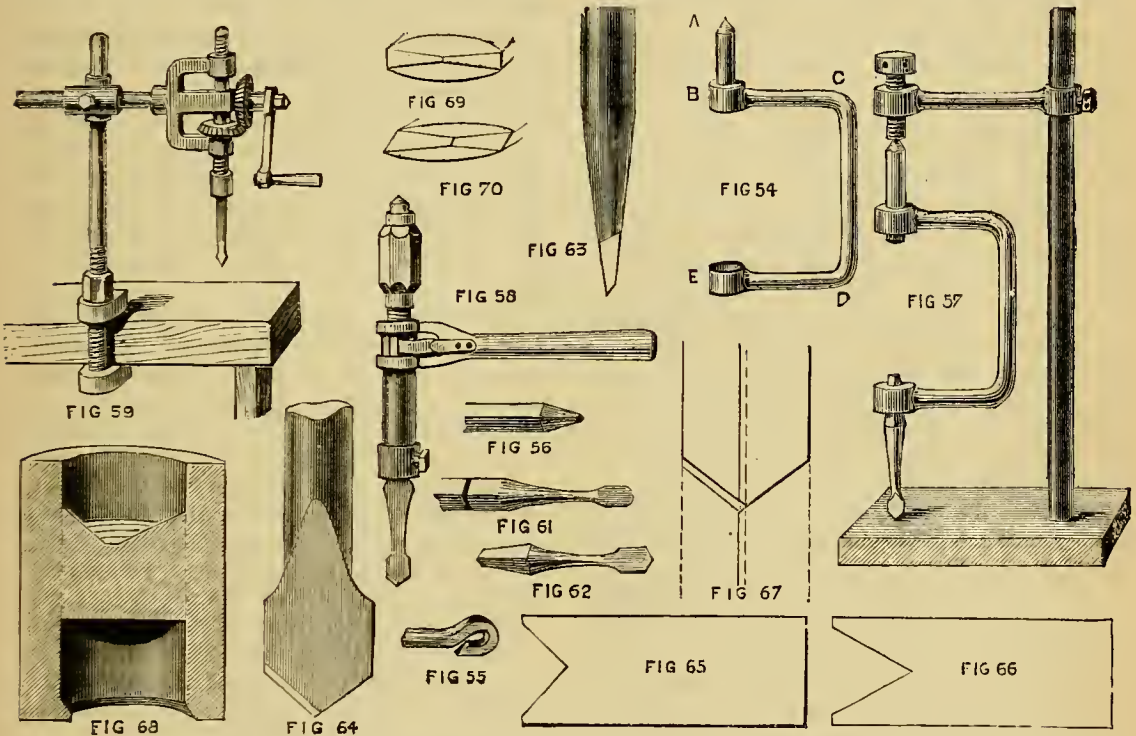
DRILLING BRACE. FIG. 55.—MODE OF TURNING EYE FOR BRACE. FIG. 56.—SQUARE TAPER PUNCH OR MANDREL. FIG. 57.—BRACE IN POSITION UNDER MOVABLE BRACKET. FIG. 58.—RATCHET BRACE. FIG. 59.—EVANS'S DRILLING MACHINE. FIG. 60.—DRILL FOR CAST IRON. FIG. 61.—PROCESS OF MAKING DRILL. FIG. 62.—FORGED DRILL. FIG. 63.—TAPER OF DRILL BLADE. FIG. 64.—DRILL FOR CAST IRON. FIGS. 65, 66.—GAUGES FOR DRILLS. FIG. 67.—DIAGRAM ILLUSTRATING BADLY GROUND DRILL. FIG. 68.—WORK DONE BY BADLY GROUND DRILL. FIG. 69.—POINT OF DRILL GROUND WITHOUT CLEARANCE. FIG. 70.—POINT OF DRILL SHOWING PROPER CLEARANCE OF EDGES AND CORNERS.
